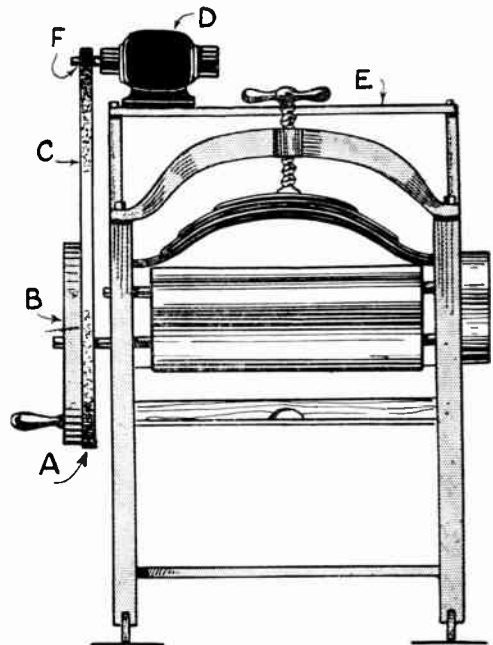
A, V-belt pulley clipped to flywheel B. C, V-belt, $\frac{3}{4}$ in. D, motor mounted on frame E, bolted to frame of wringer. F, small V-pulley on motor.
